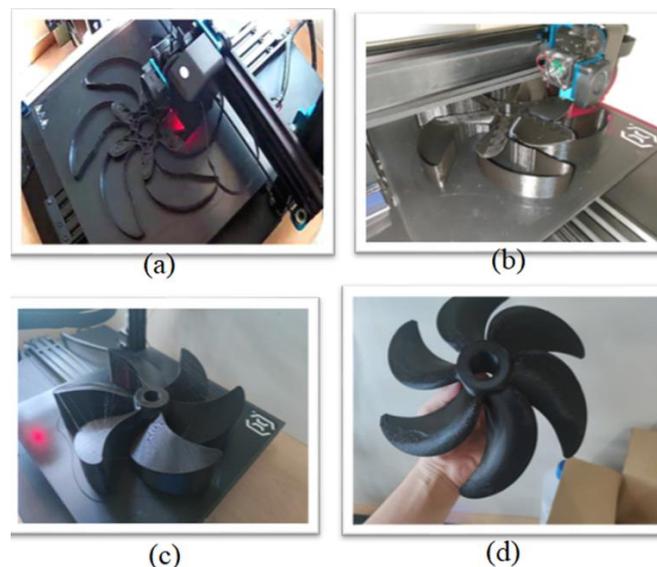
The 3D printing process (a) the support base is printed (b) printing in progress (c) completed printed propeller (d) propeller removed from the support base.
